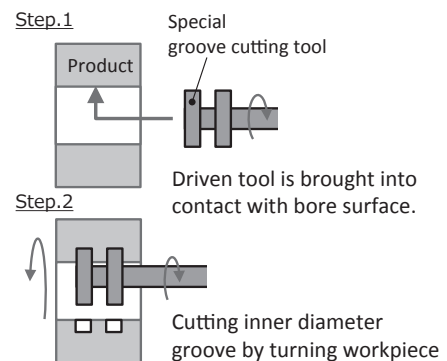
Inner Diameter Groove Cutting Method (Schematic Illustration)
